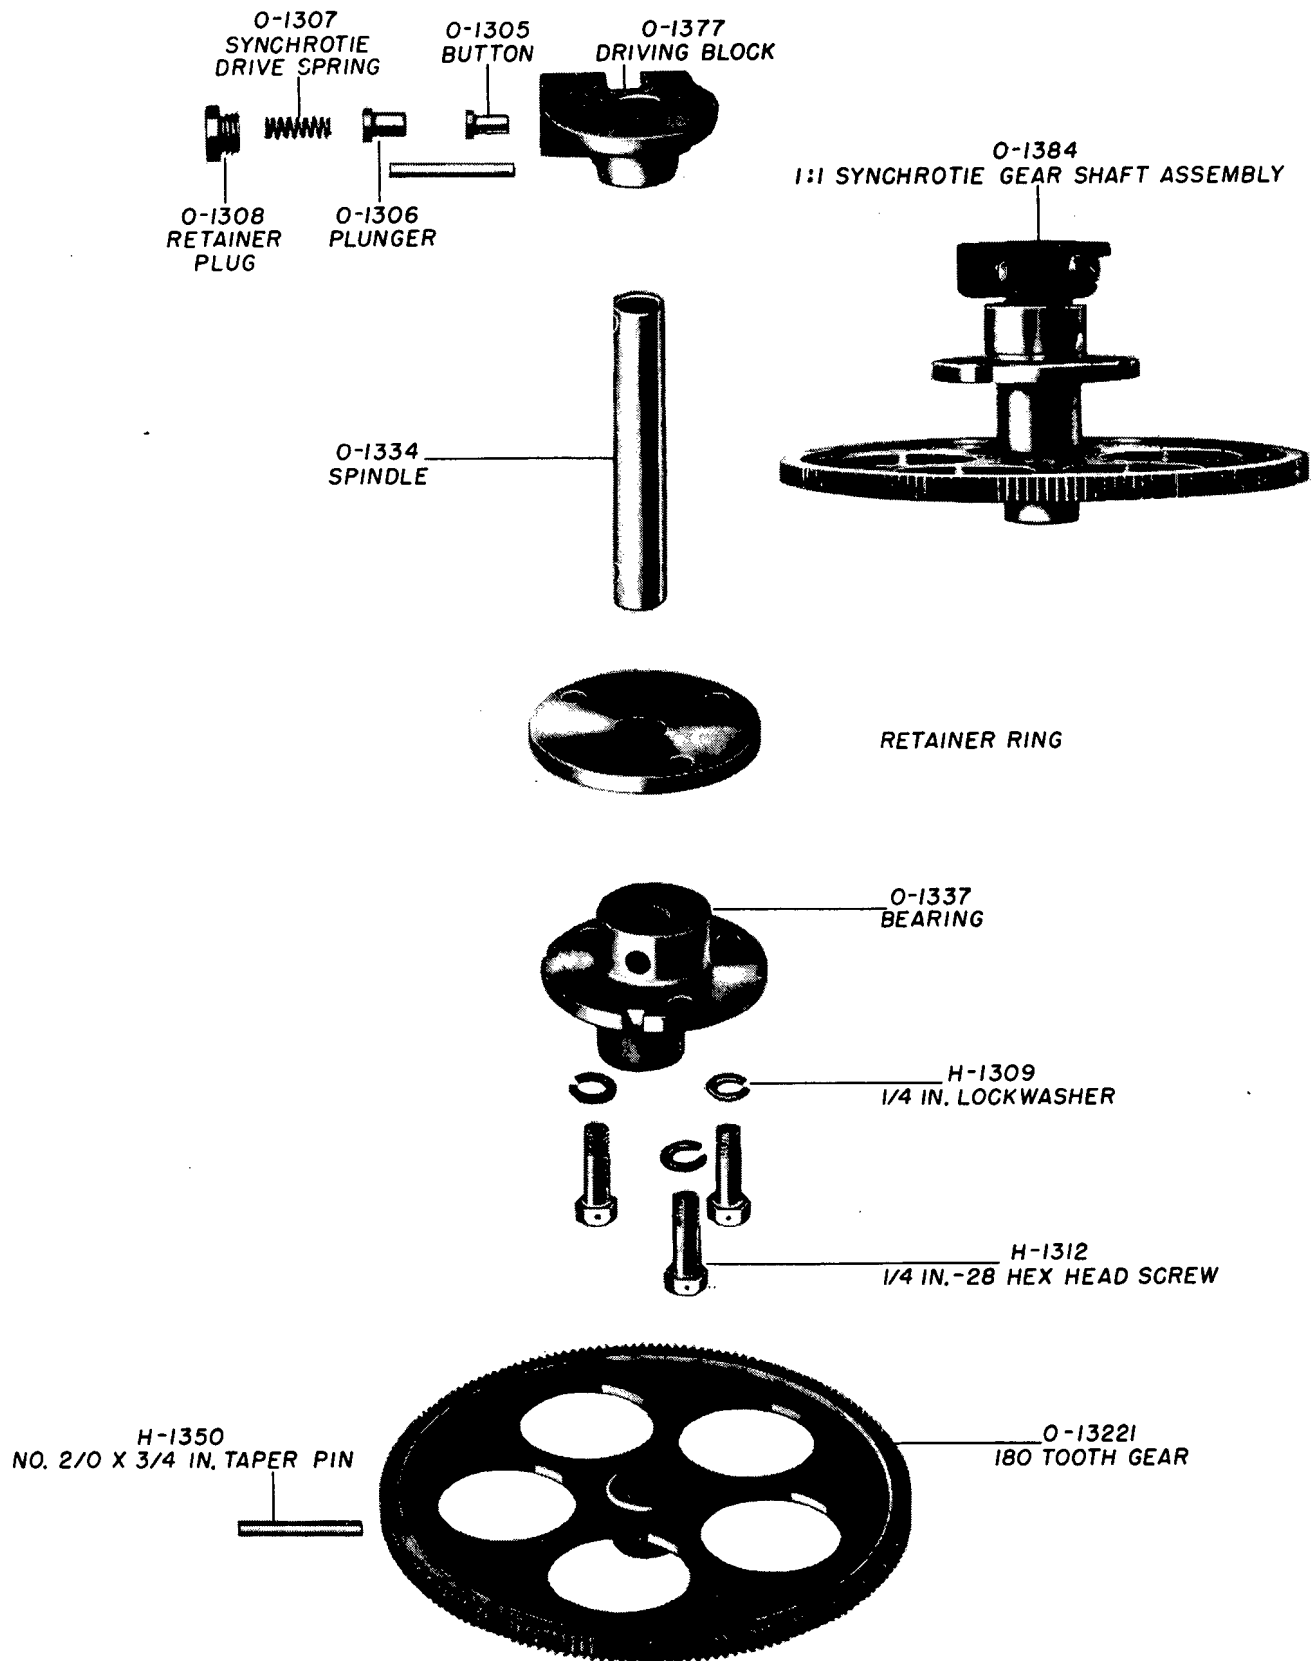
One-to-One Synchrotie Gear Shaft Assembly O-1384
